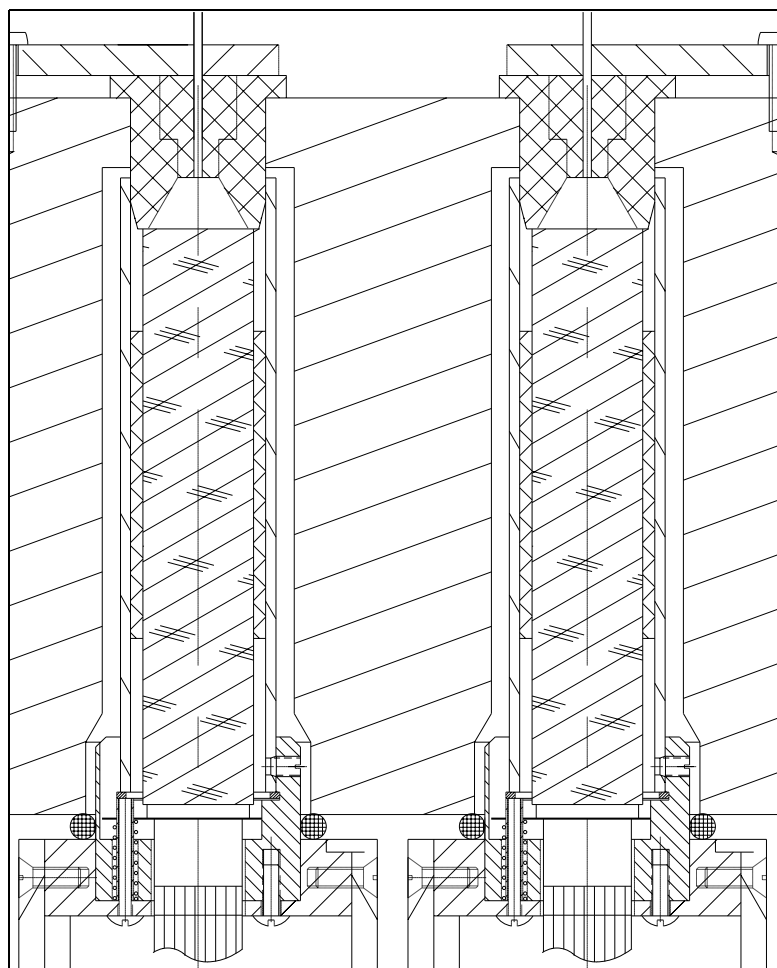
The custom designed mounting fixture used to attach the PMTs to the front of the drawers.
